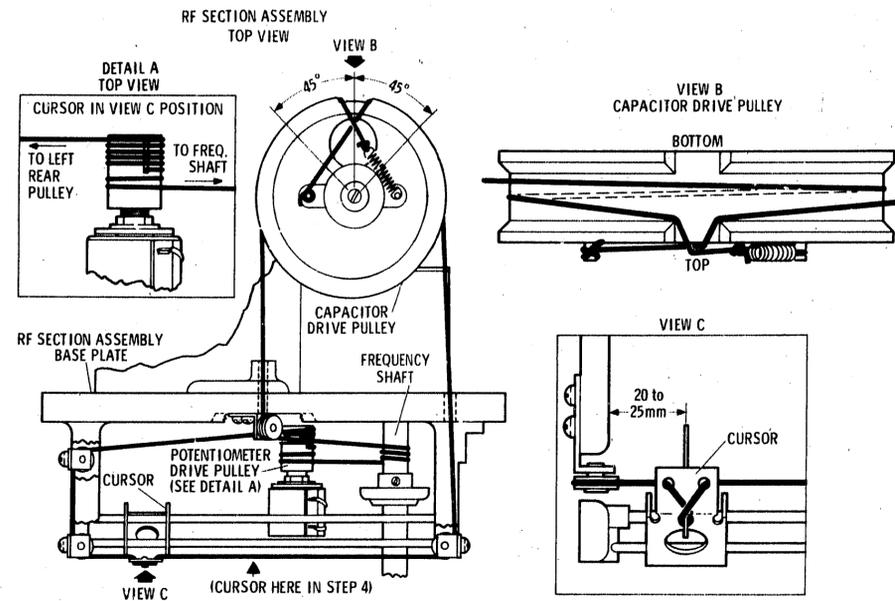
RF Section Assembly Illustrated Parts Breakdown
